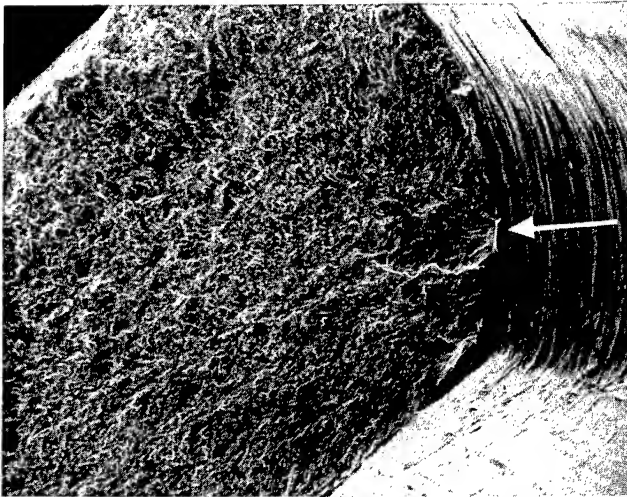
SEM fractograph of E1 showing edge scratches at crack origin. Mag. 250x.
